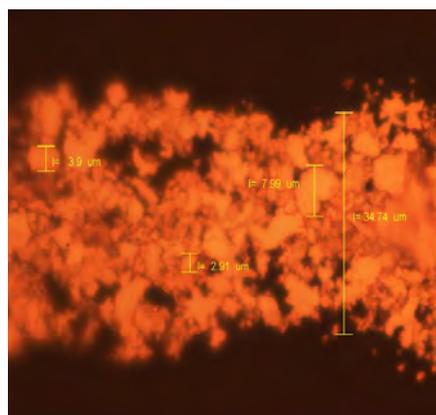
Stencilprinting results: zoomed top view of the smallest printed lines
